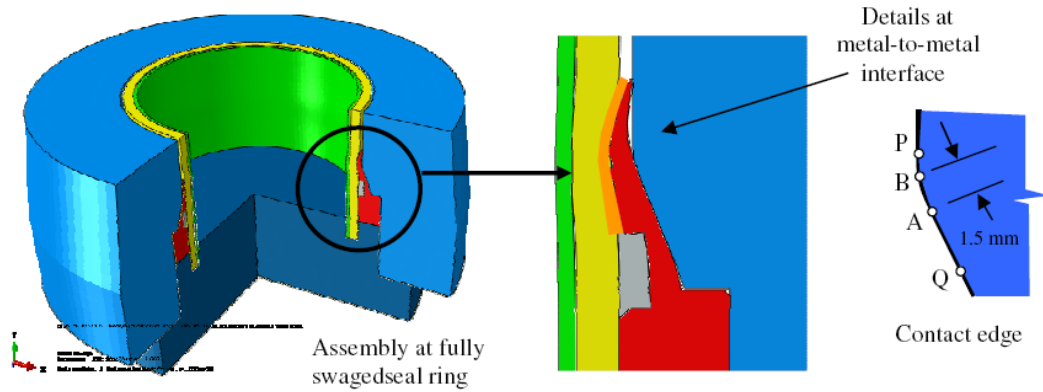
The details of the metal-to-metal interface, from Fernando et al. [2012].
